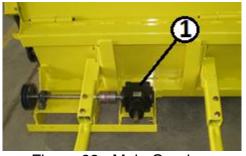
Main Gearbox Key 1 – Fill Hole (breather removed for clarity)
